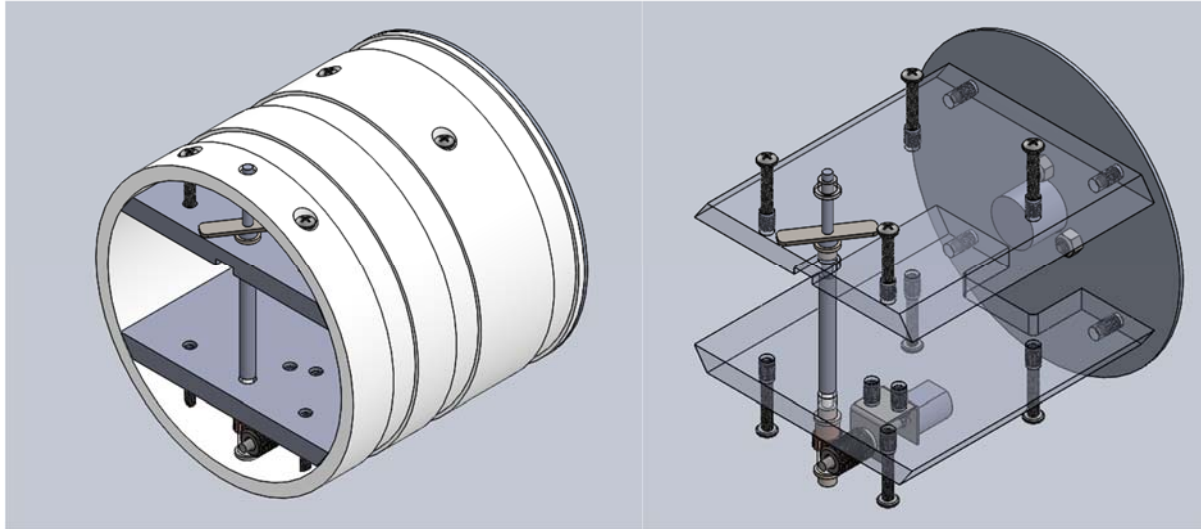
The Cylinder and its internal assembly. On the right the cylinder has been hidden to show the internal components.
